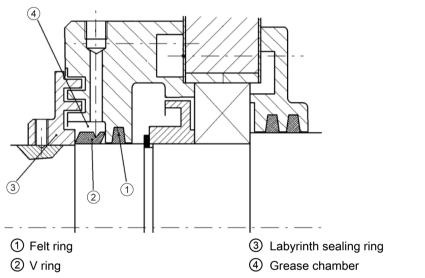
Roller-contact bearing with grease chamber (schematic diagram)
